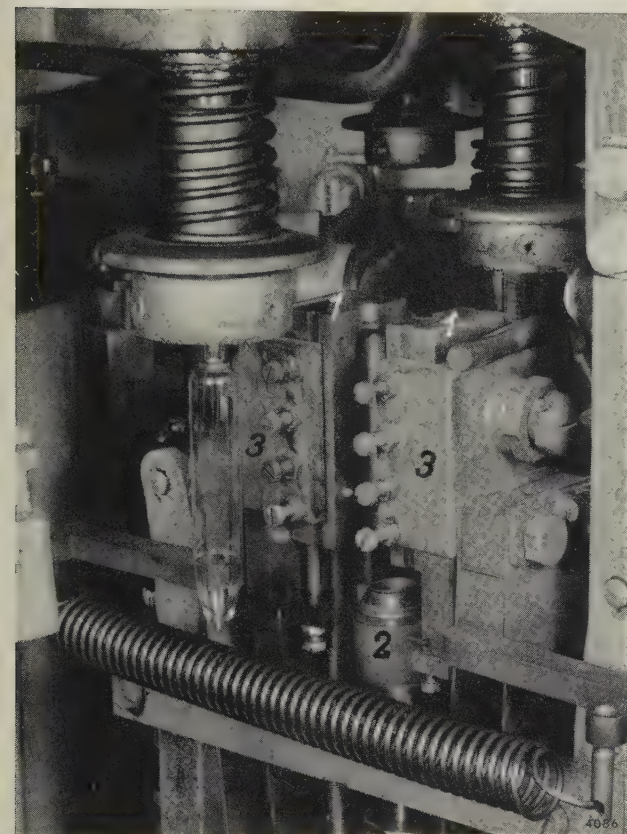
Part of the 18-head machine showing a blow-mould. The mould shown here consists of three sections, i.e. two semi-cylindrical parts 1 which move towards each other horizontally to close, and a rising base 2. By unscrewing the bolts, the mould halves can be taken from the holders 3 and replaced by others.
